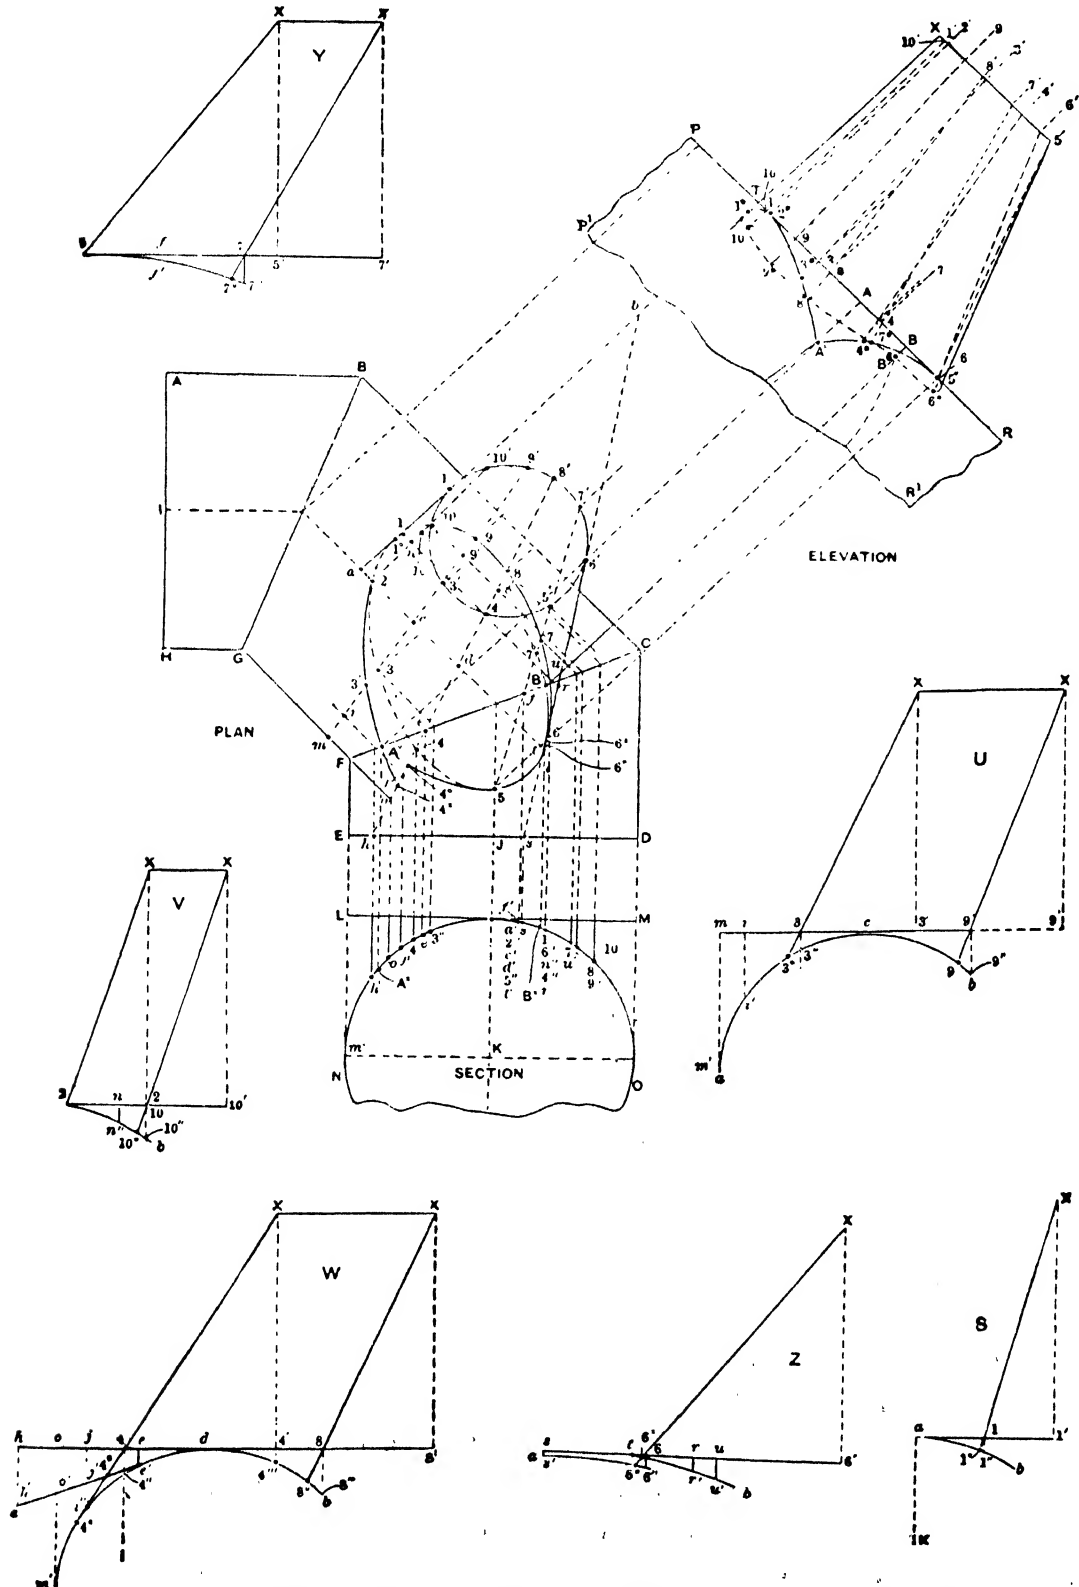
Plan, Elevation and Developed Sections of Flaring Hopper Joining a Pieced Elbow
